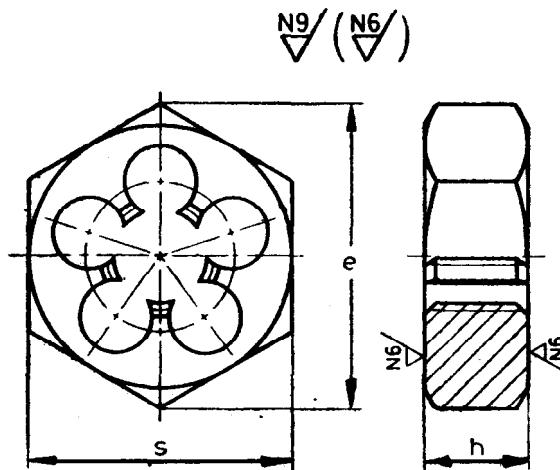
DIMENSIONS FOR HEXAGONAL DIE NUTS
